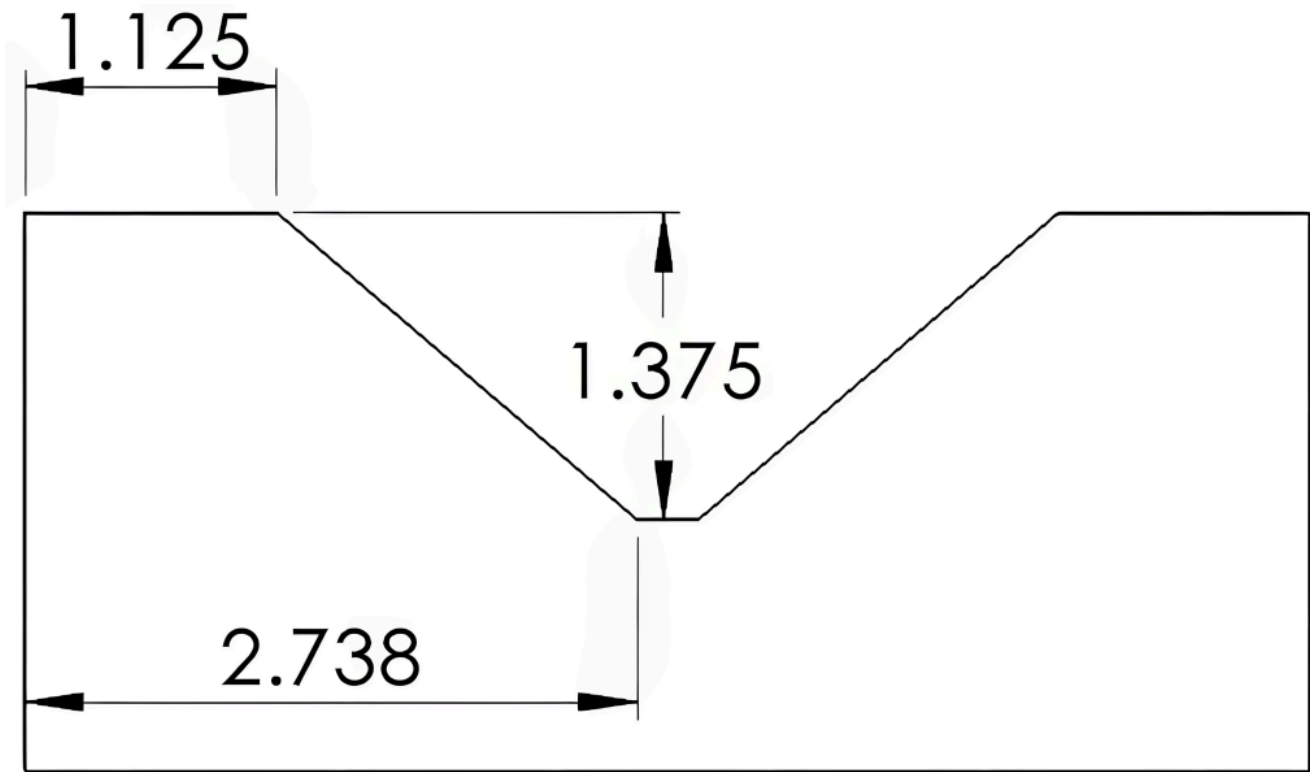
Linear dimensions are used to identify endpoints of an angular dimension.
